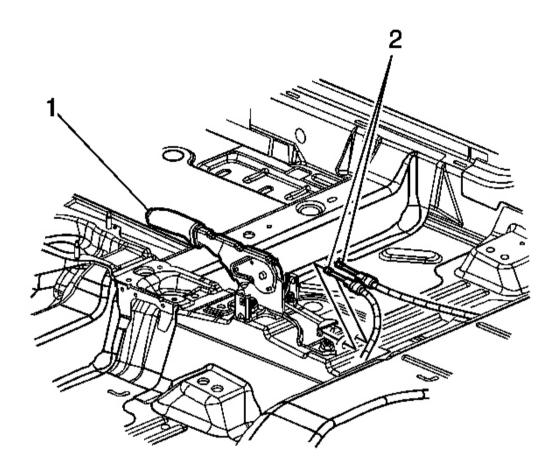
Releasing Rear Park Brake Cable From Cable Equalizer Courtesy of GENERAL MOTORS CORP.
